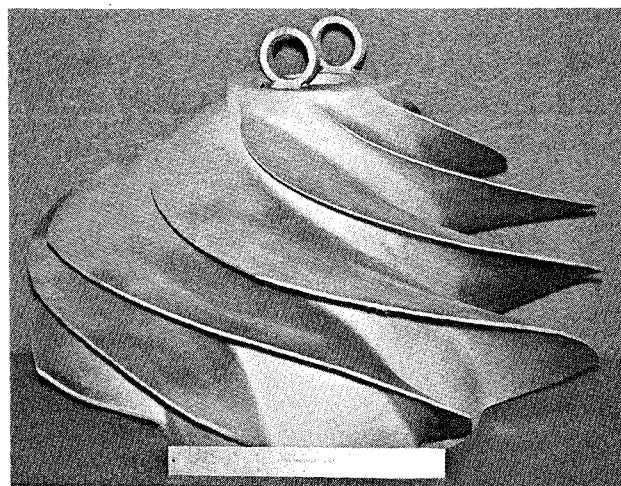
Rocketdyne inducer—large titanium investment casting.
